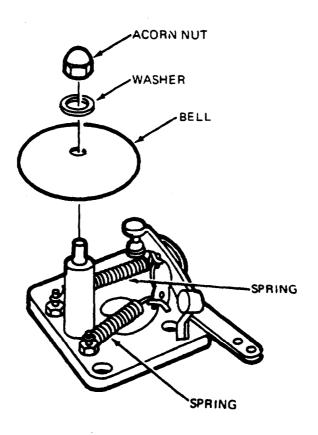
Disassemble/Assemble Bell Mechanism.
